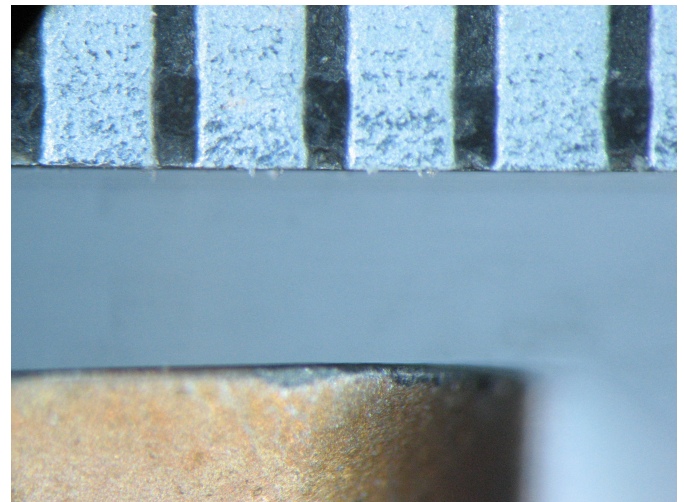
TOOL WEAR FOR MILD CUTTING CONDITIONS (TEST 2)
